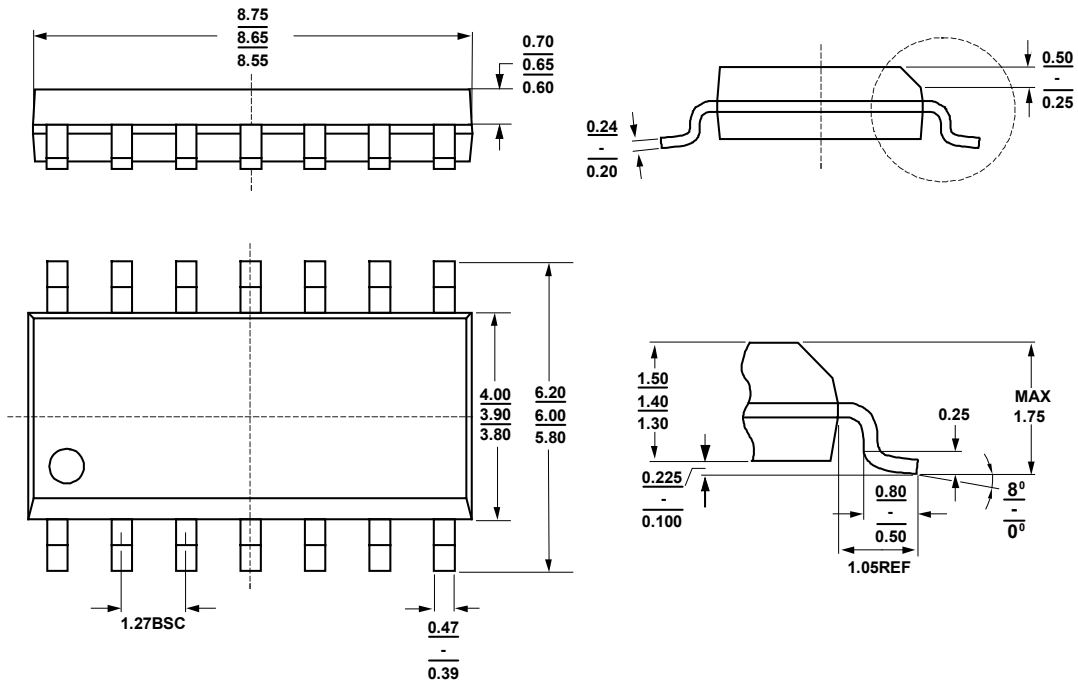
14-Lead SOIC Package Dimensions shown in millimeters
